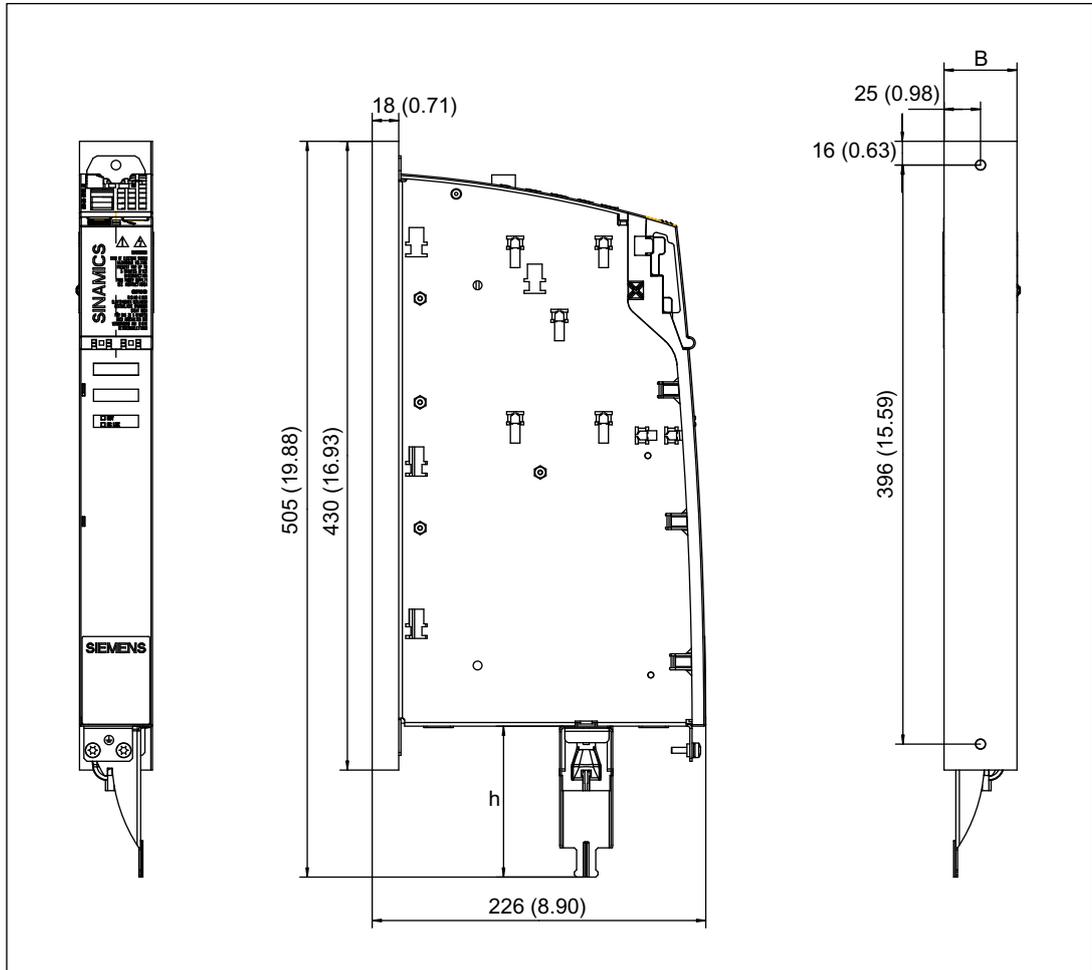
Dimension drawing of Motor Module with cold plate 3 A to 18 A and 2 x 3 A to 2 x 9 A
